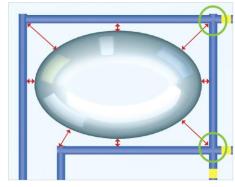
Conventional tooling mold temperature control. Uneven distances to the cavity surface throughout the length of the channels (Source: [5])
